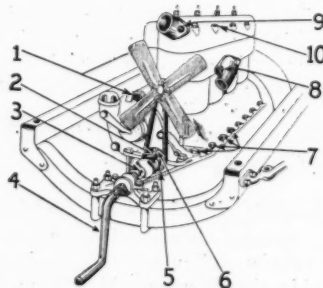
Ford engine in process of preparation for mounting Gray & Davis system
